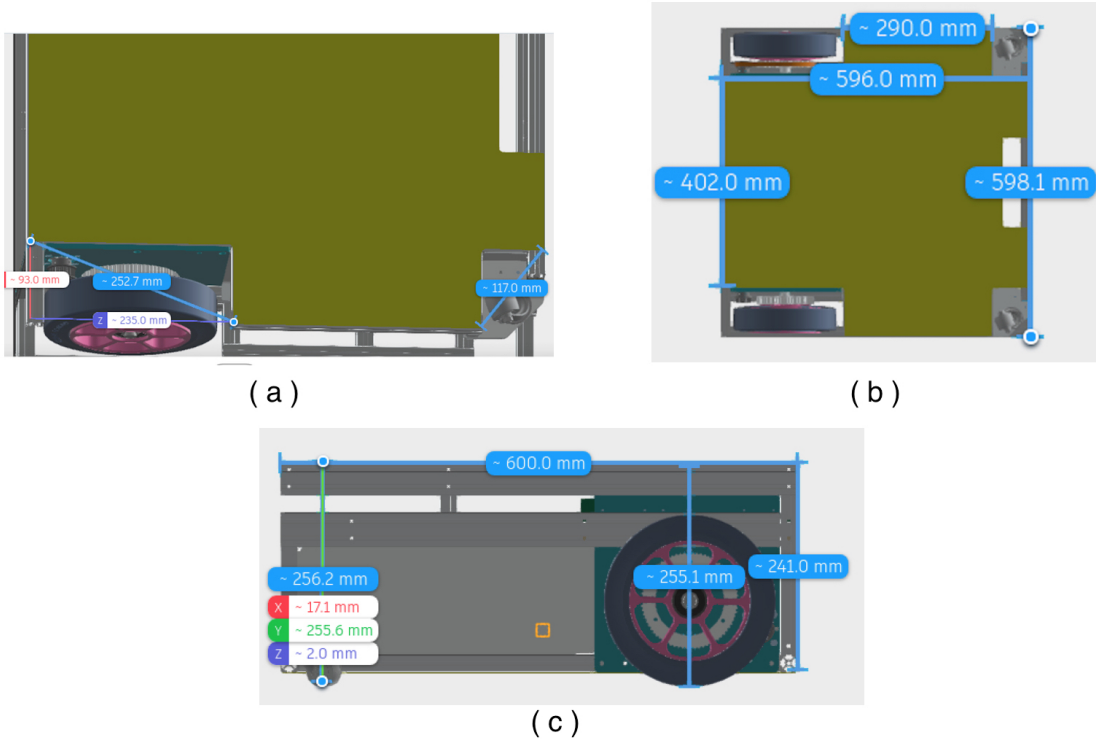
(a) is angled view for wheels, (b) is the top view and the (c) is side view
